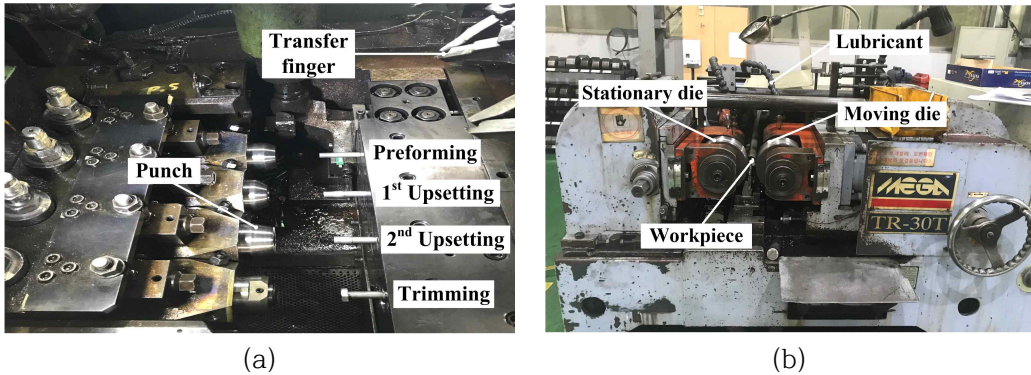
Experiment equipment for manufacturing Al6061 alloy bolts: (a) cold-former, (b) thread-rolling machine.
